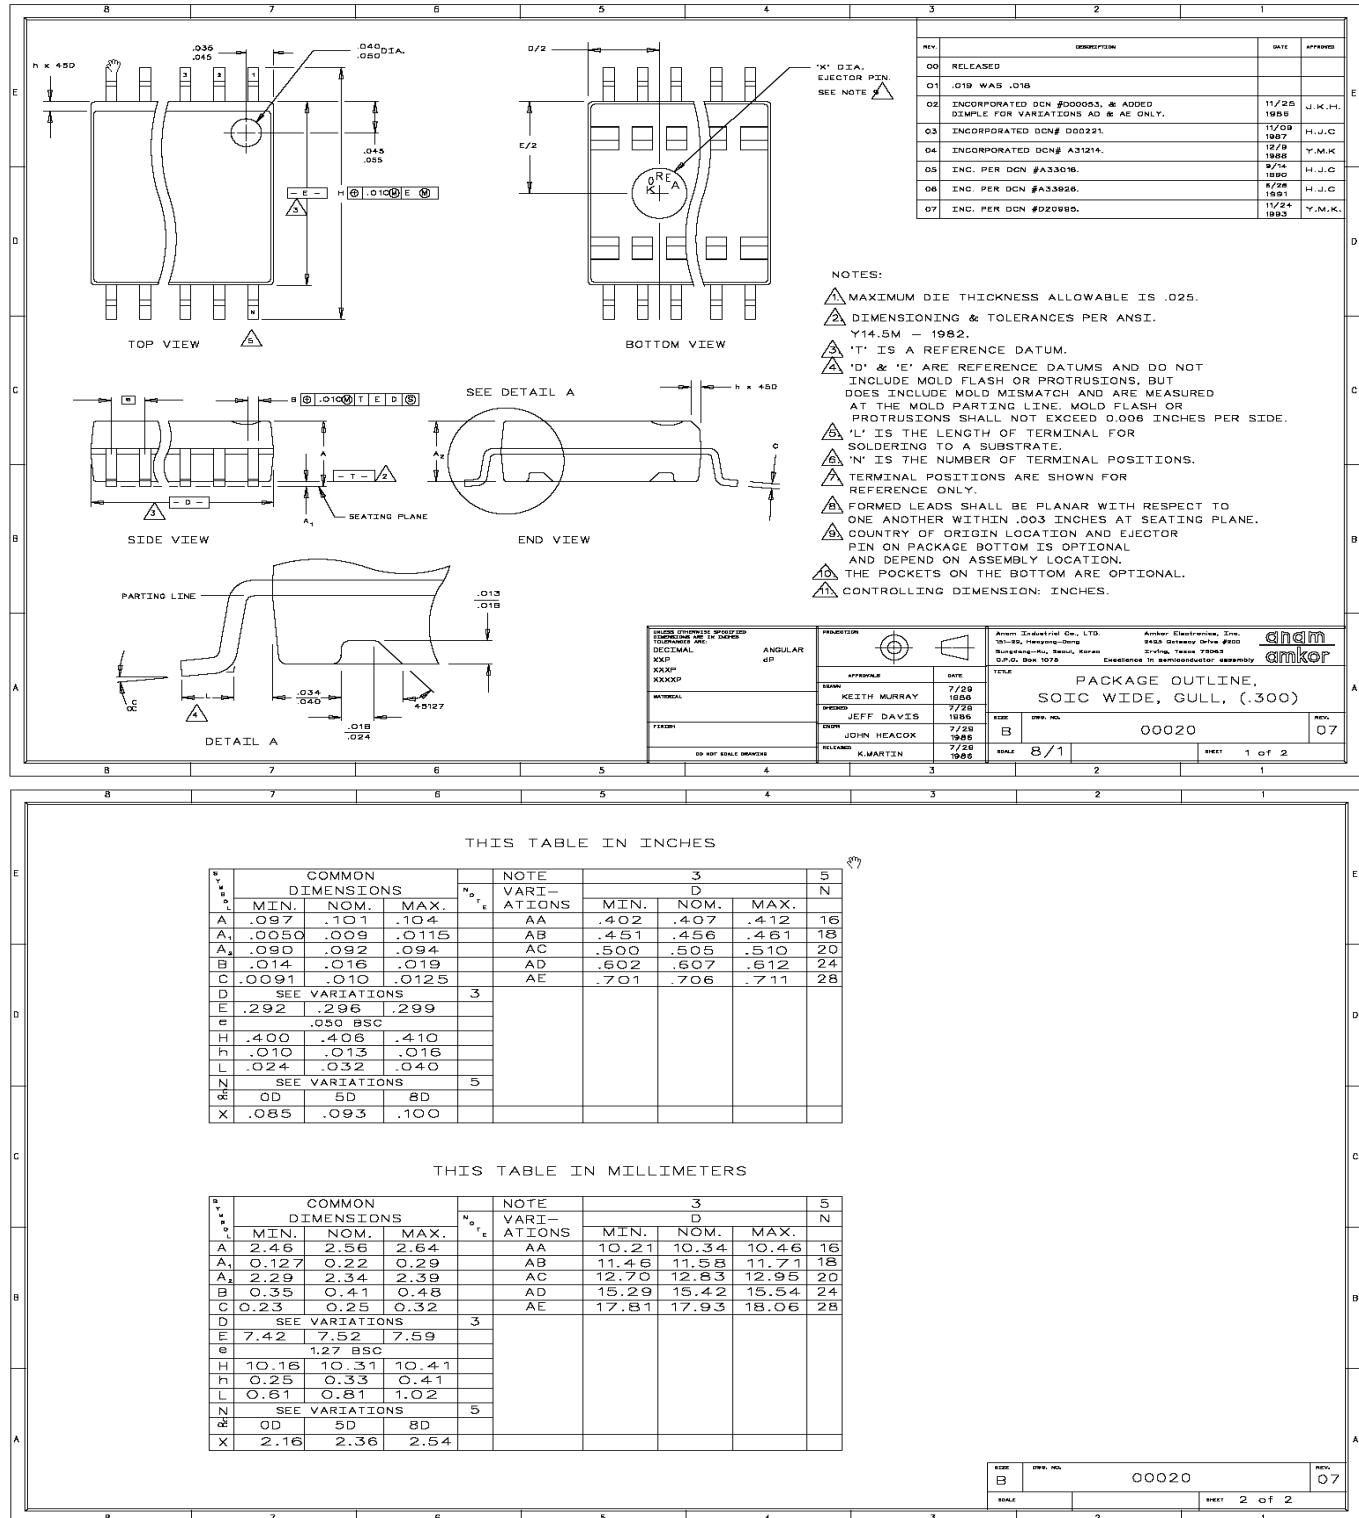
Package Drawings and Dimensions for the SOP16/SOP20-300mil versions
